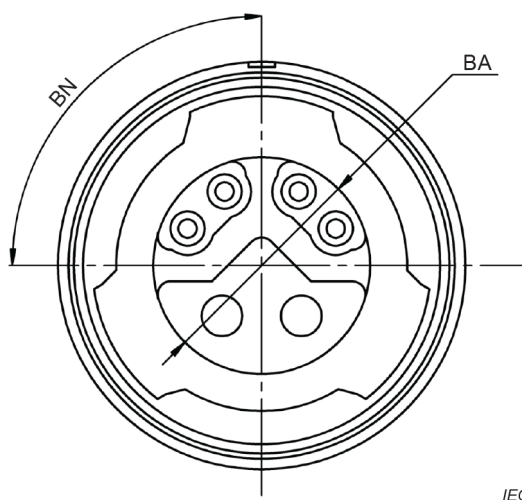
Front view of the female side of the push-pull housing for Type 3
